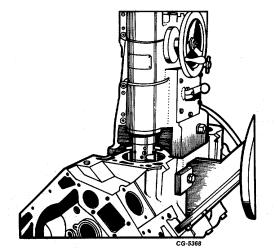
Reboring Cylinder Using SE-1399 Boring Machine
